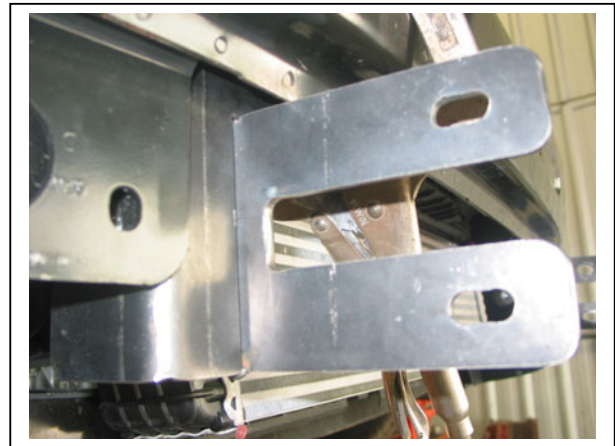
Placement of ECB steel mount. Drivers side shown. Pull forward as far as possible.
